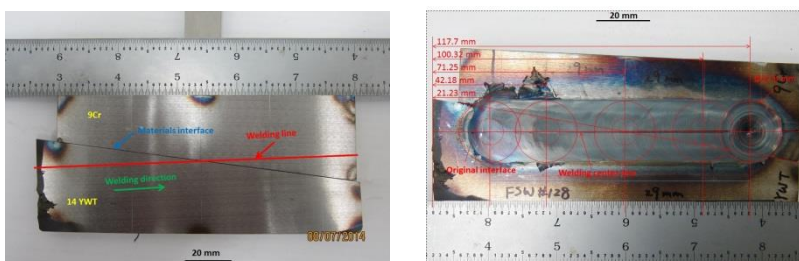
Dissimilar materials 14 YWT and F/M steel FSW plan and the welded joint
